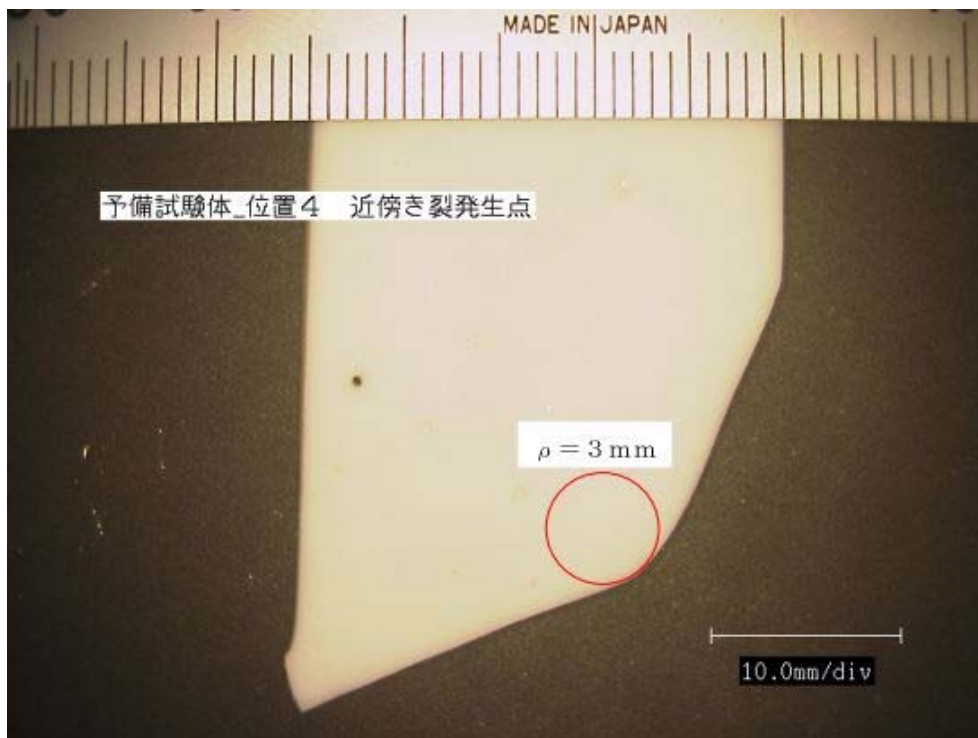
Weld profiles of the saddle part in specimen1 (T1), $\rho=3\text{mm}$.
